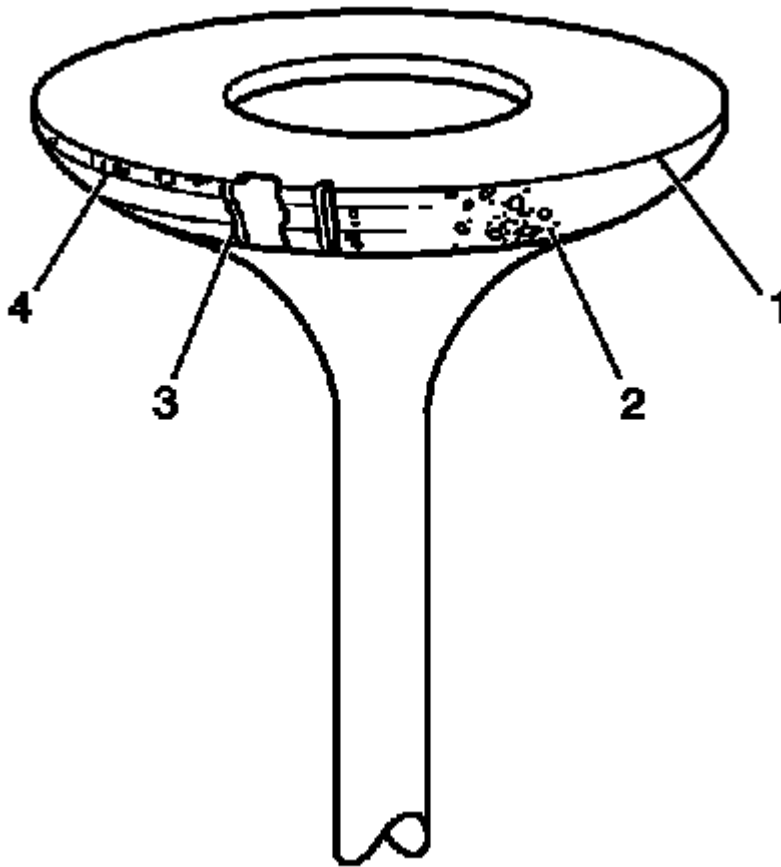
Inspecting Valve Face For Burning, Pitting & Cracking
